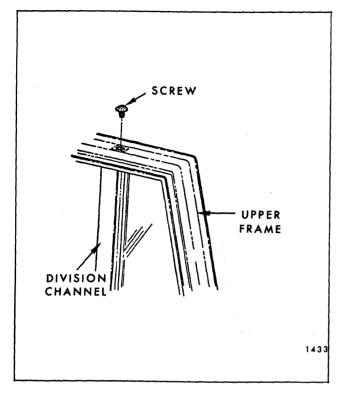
Rear Door Ventilator Attachment - "X" Styles
